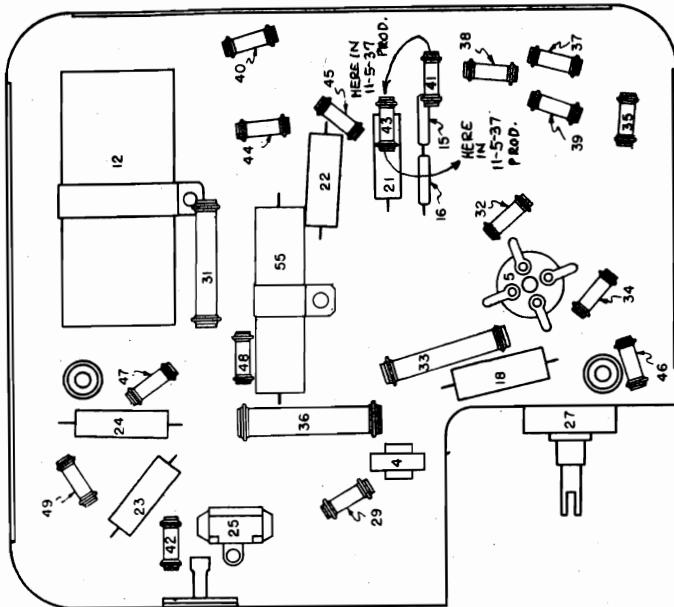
PARTS LAYOUT-BOTTOM VIEW
